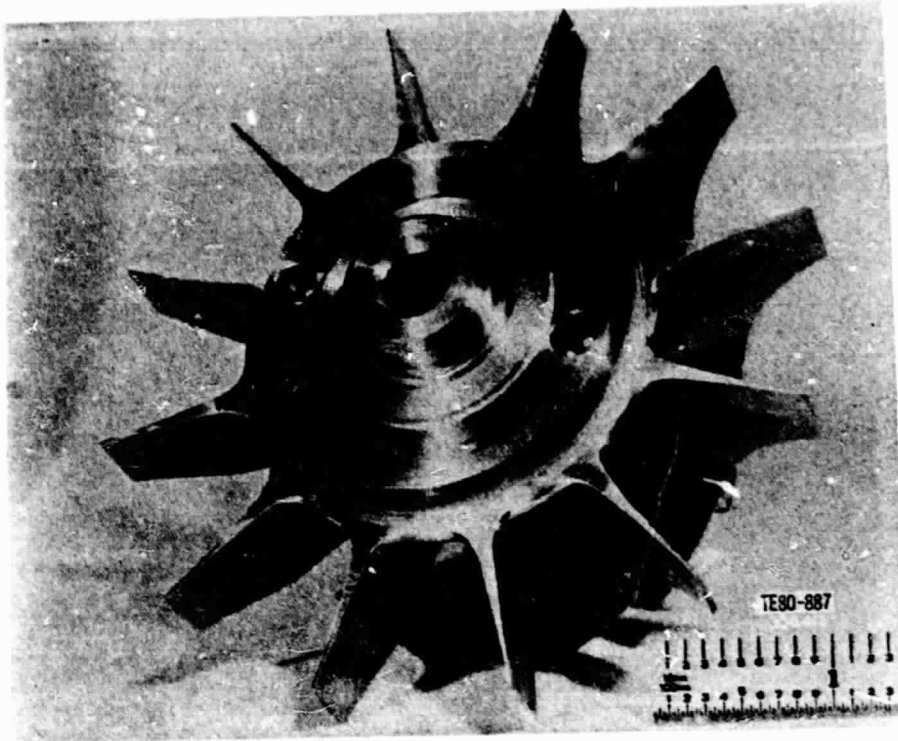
Photo of Finish-Machined Gasifier Turbine Wheel (bottom).
